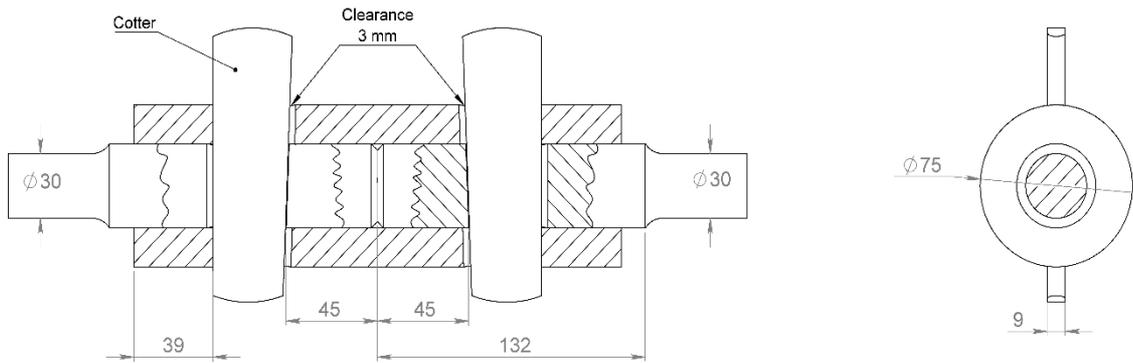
Assembly drawing of sleeve and cotter joint
